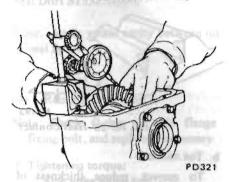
Measuring Backlash of Ring Gear and Pinion
